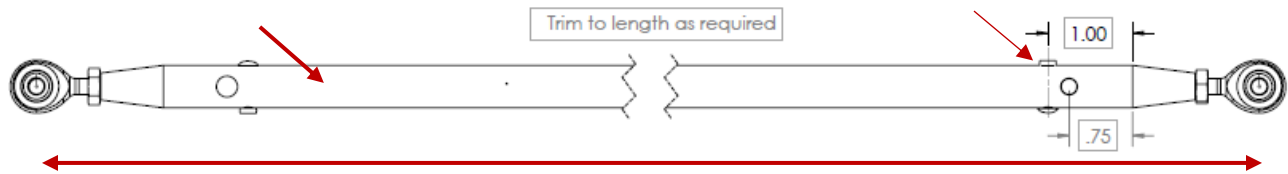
ROLL SERVO ARM CENTER TO CENTER DISTANCE & RIVET LOCATIONS
